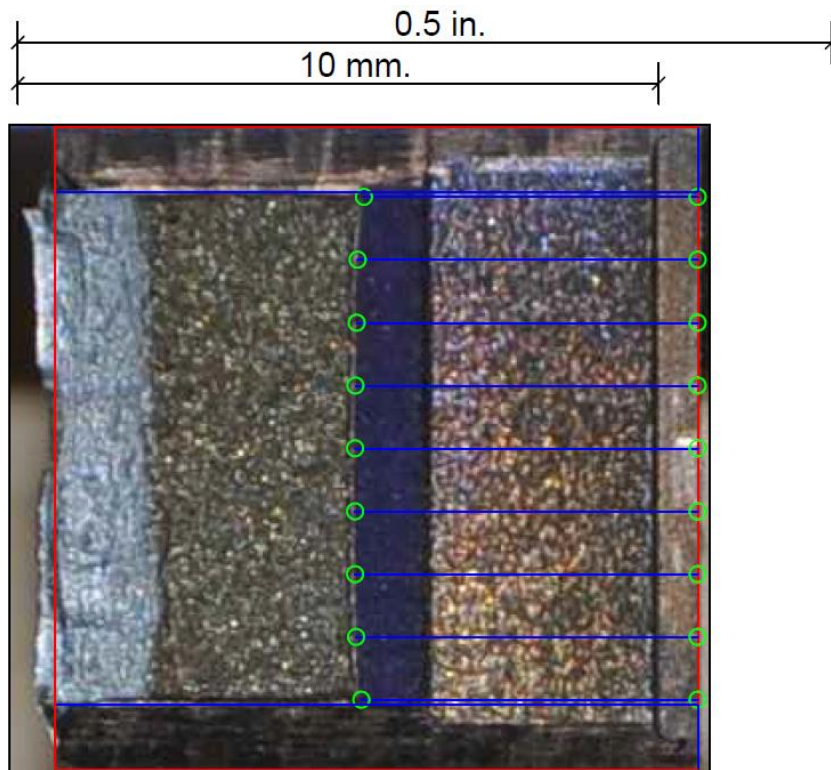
Specimen E27' Fracture Surface
